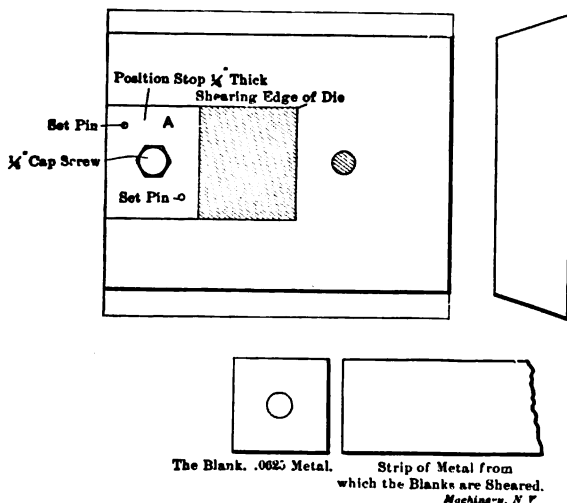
Blanking Die for Square Washers. Shaded Portions in Die Indicate Parts punched out from Stock
